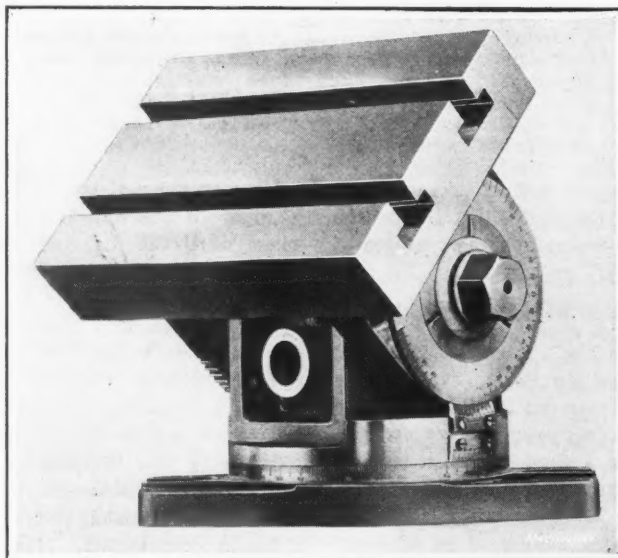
Universal Angle Fixture developed for C. H. Tracey Co. by John R. Beckett
